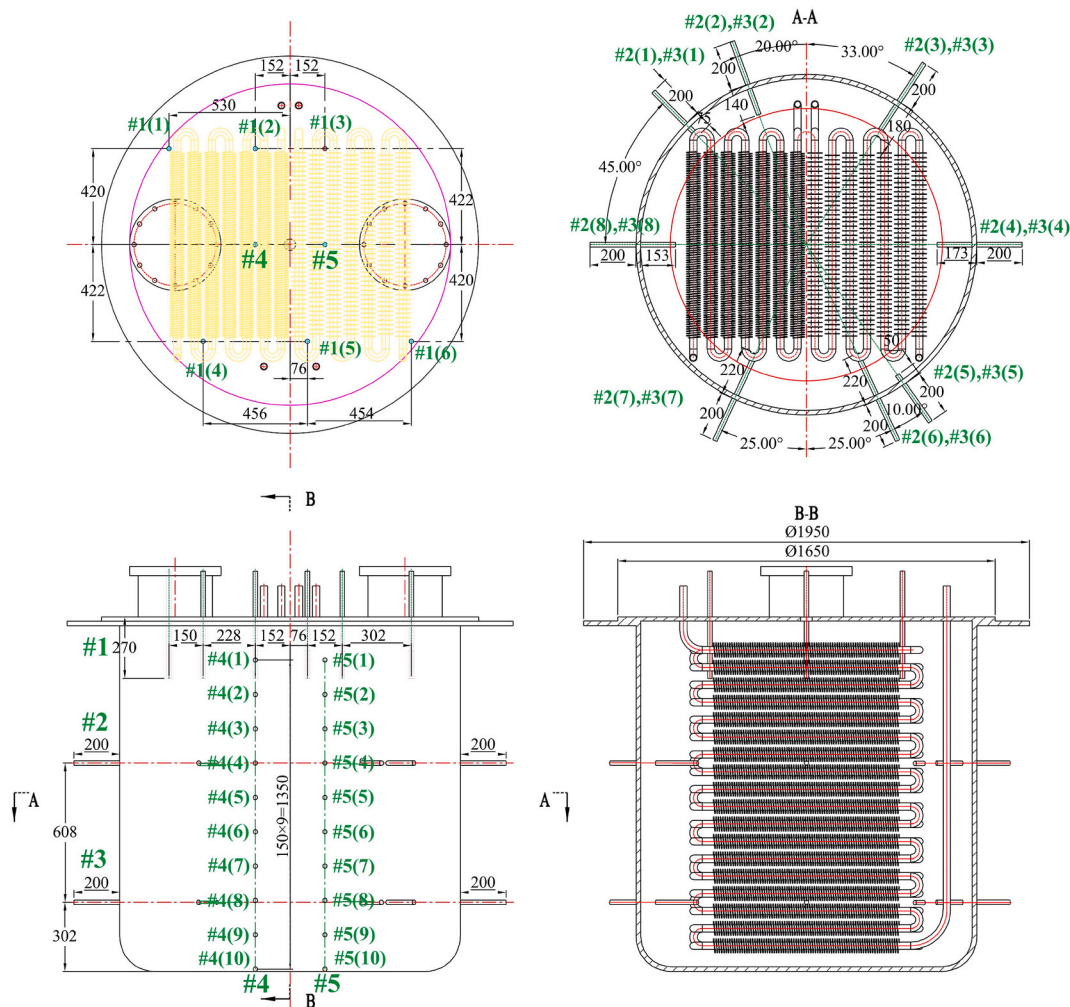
Details regarding the dimensions of the PCM tank and thermocouples locations (unit: mm).
